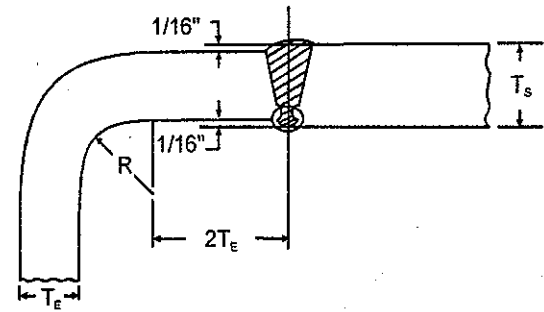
FLANGED FLAT END PLATES TO SHELL (SHELL THICKER THAN ENDS)
